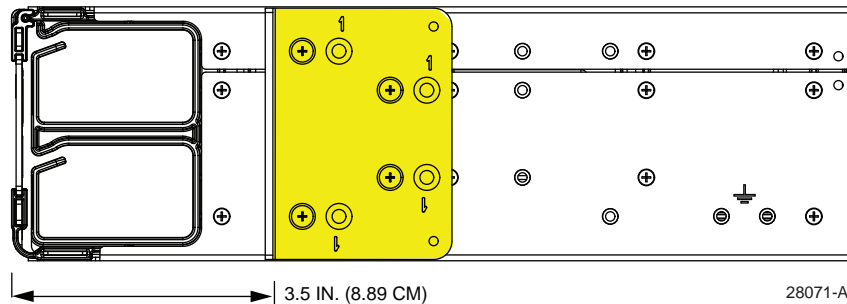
Rack Mounting Position for 3.5-Inch Recess
